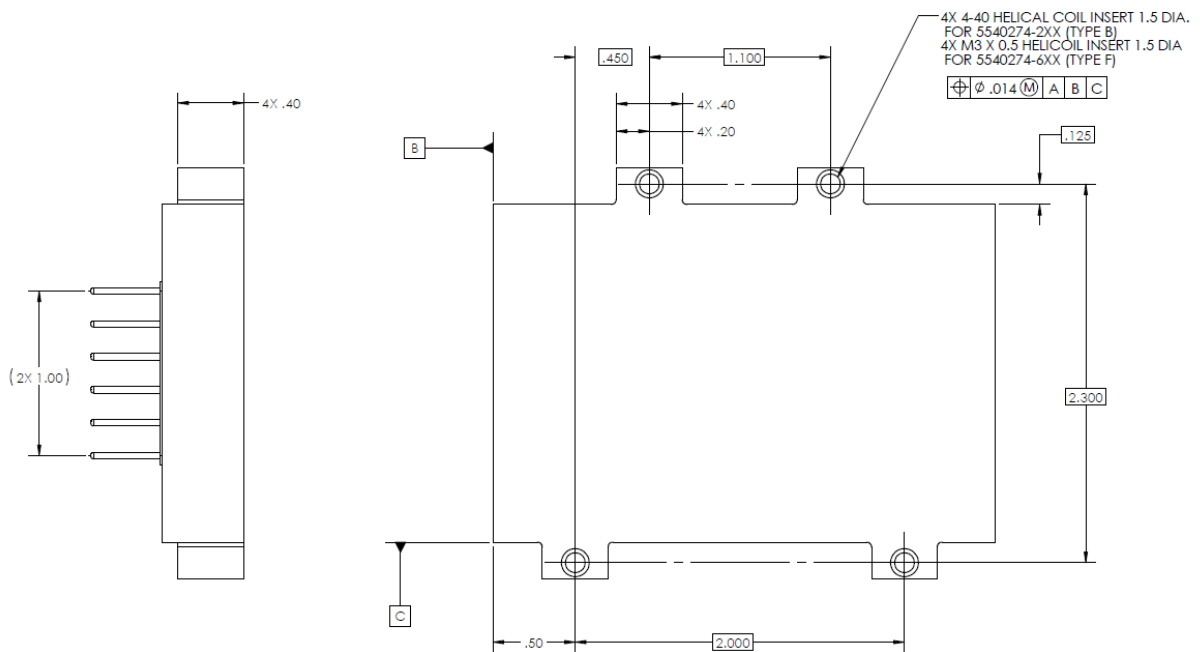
Axial Pins and Threaded Tabs Package Bottom View (-B or -F)
